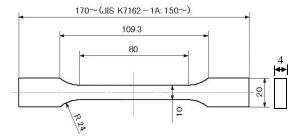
Carbon fiber standard tensile specimen (All dimensions in mm).
